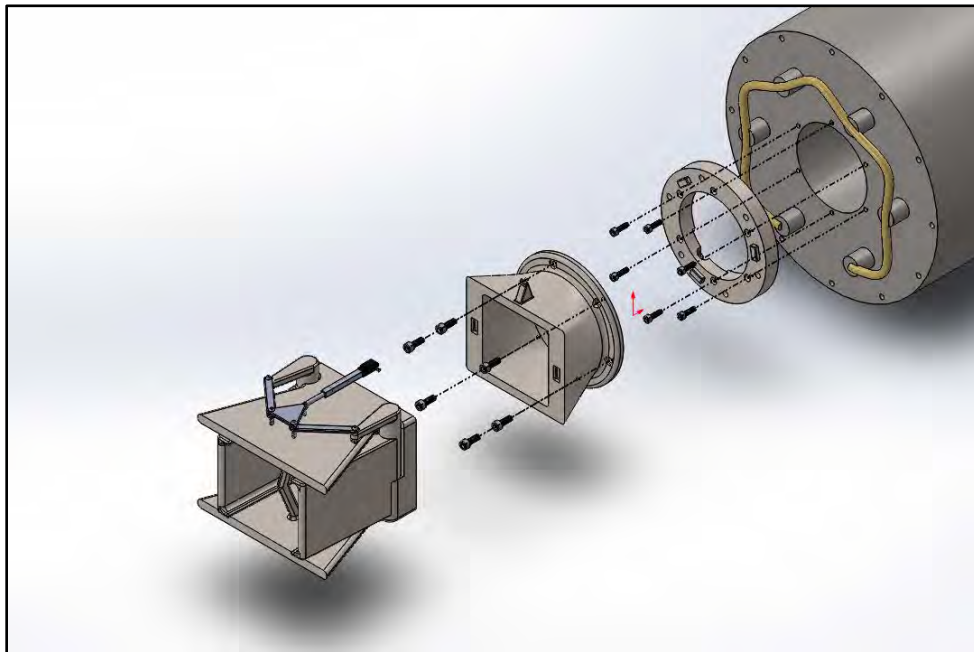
Depiction of the mounting flange, throat, and diverging section as they would be assembled in their attachment to the engine.
